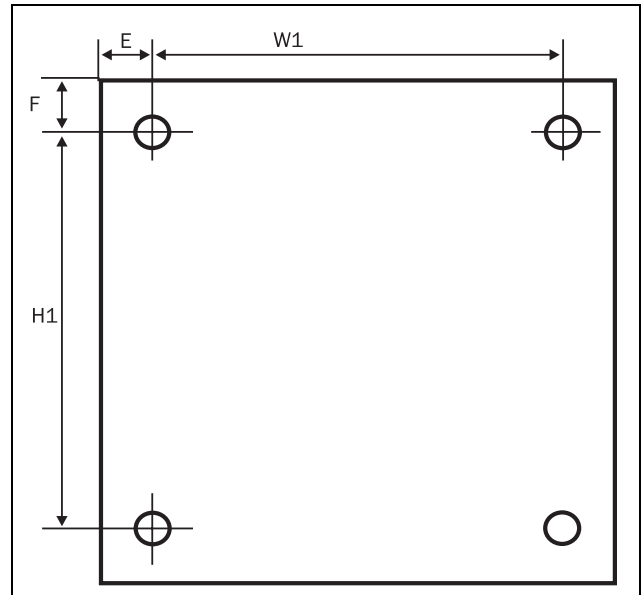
Hole pattern for screw attachment, MSF-310 to MSF-835. Hole distance (mm).
